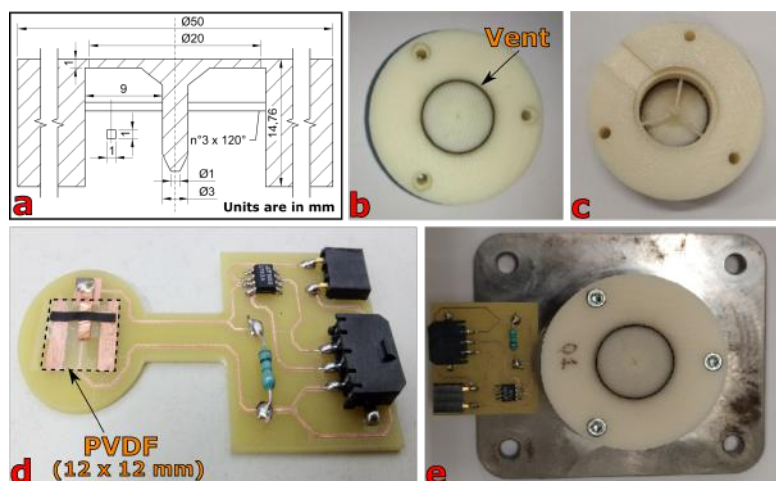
Fabrication and assembly process of the 3D-printed single-pillar piezoelectric microphone (laser-trimmed prototype taken as representative). (a) Section view of 3D-printed element, with geometrical dimensions in millimeters. (b) Top view and (c) bottom view of printed object. (d) PCB with PVDF film (left) and conditioning circuitry (right). (e) Assembly of the microphone.
